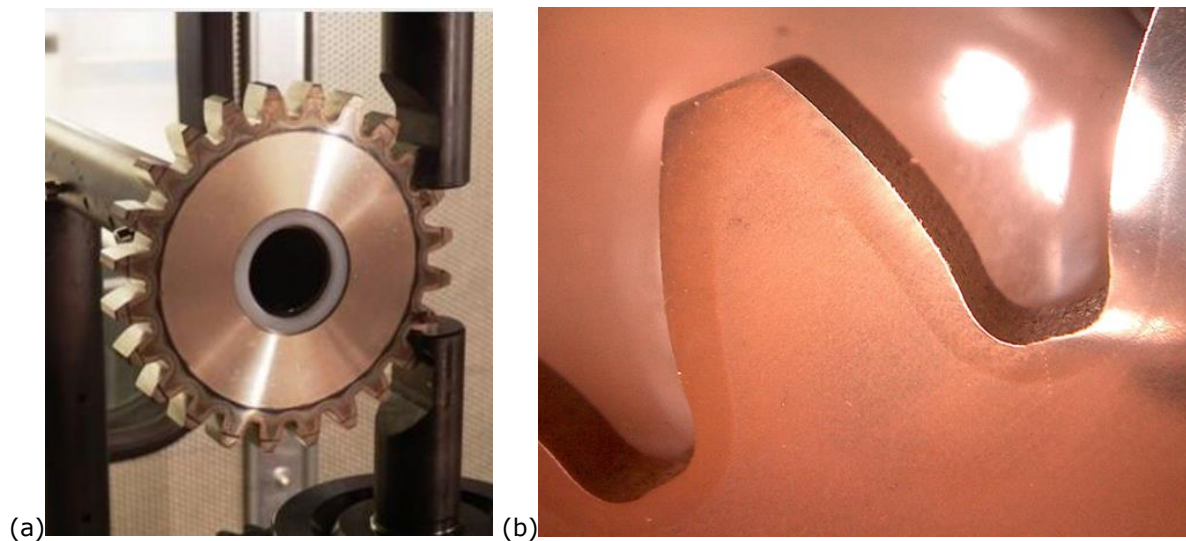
The model gear for component fatigue testing at Gerdau. (a) Mounted in the fatigue testing rig and (b) detail of the gear tooth geometry.
